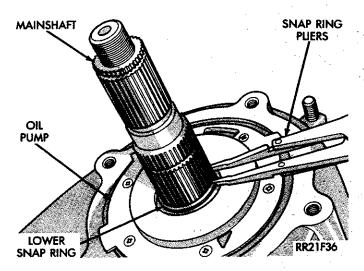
Removing/Installing Shaft Lower Snap Ring
